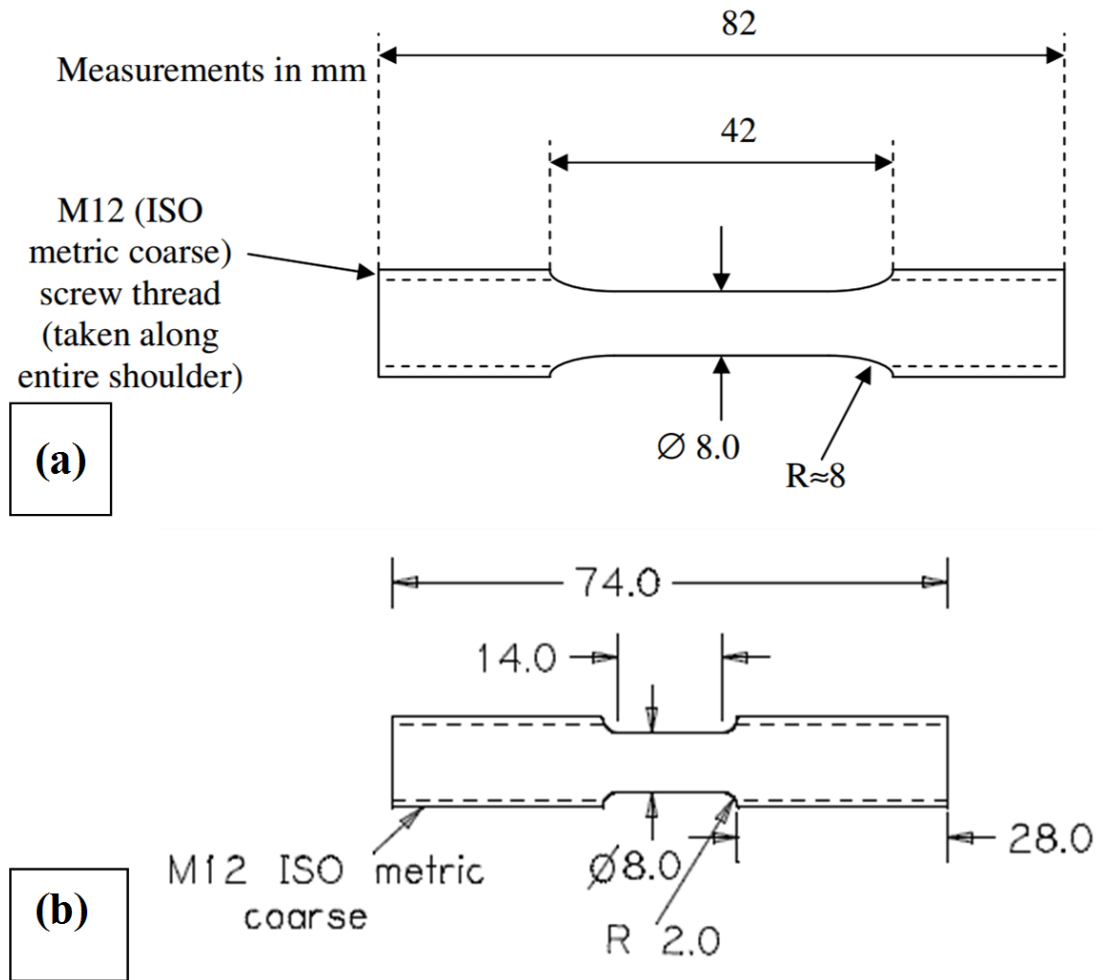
Schematic of design showing dimensions of the specimens used for the (a) tension and load-unload tests and (b) tension-compression cyclic tests. All dimensions are in mm.
